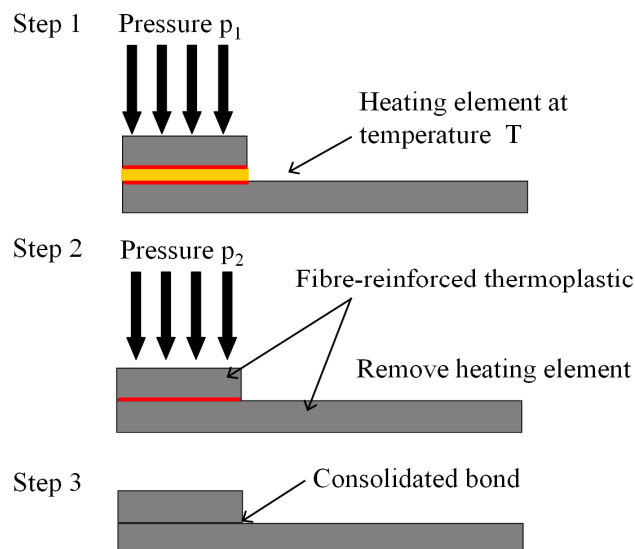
The principle of ‘hot-tool’ welding.
